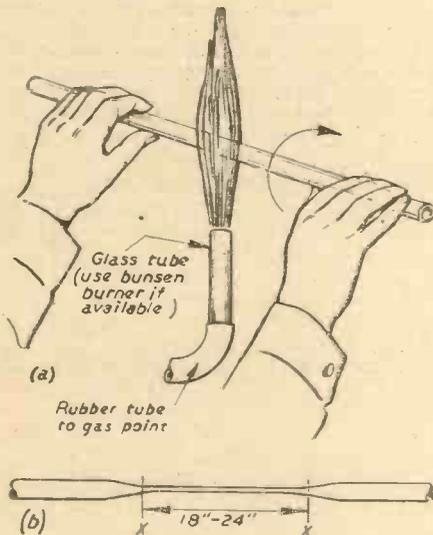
Method of heating the tube, and the appearance of the tube after heating and drawing.
